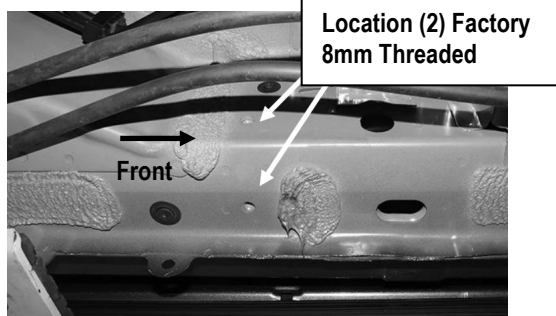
Driver Front Mounting Bracket (DFM) Installation
